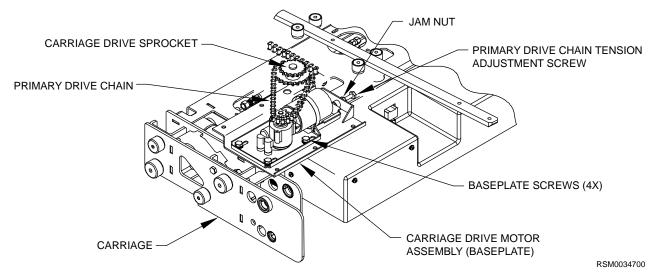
DEPLOYMENT SYSTEM-PRIMARY DRIVE CHAIN
